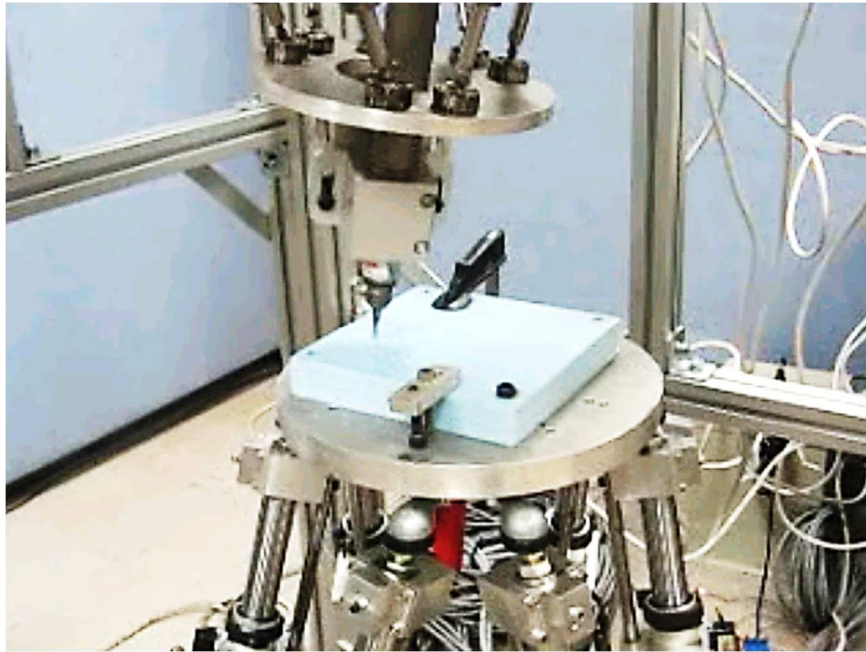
Machining a clamped work-piece on the table-SP with the tool-
